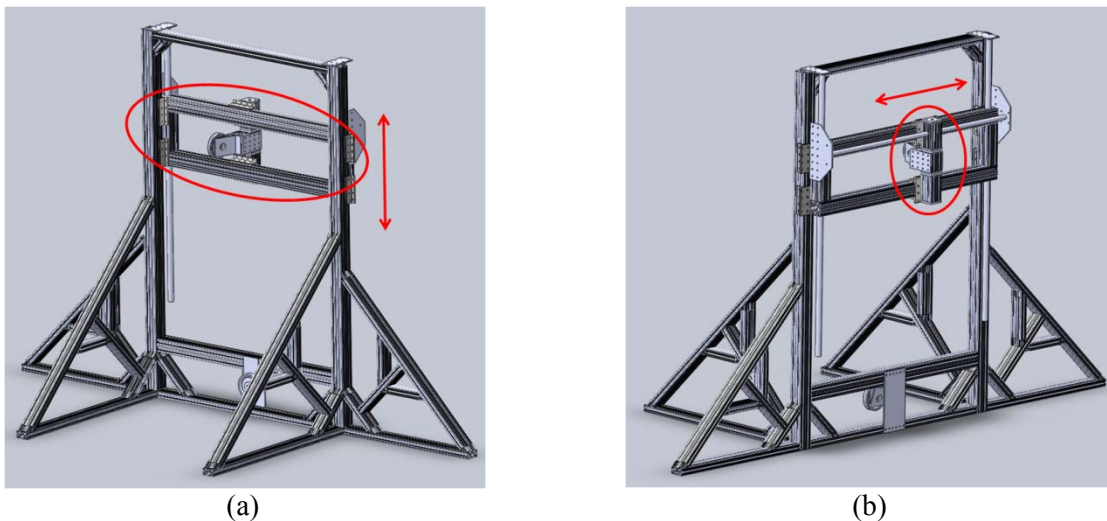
Test Stand (a) Front View and (b) Rear View
